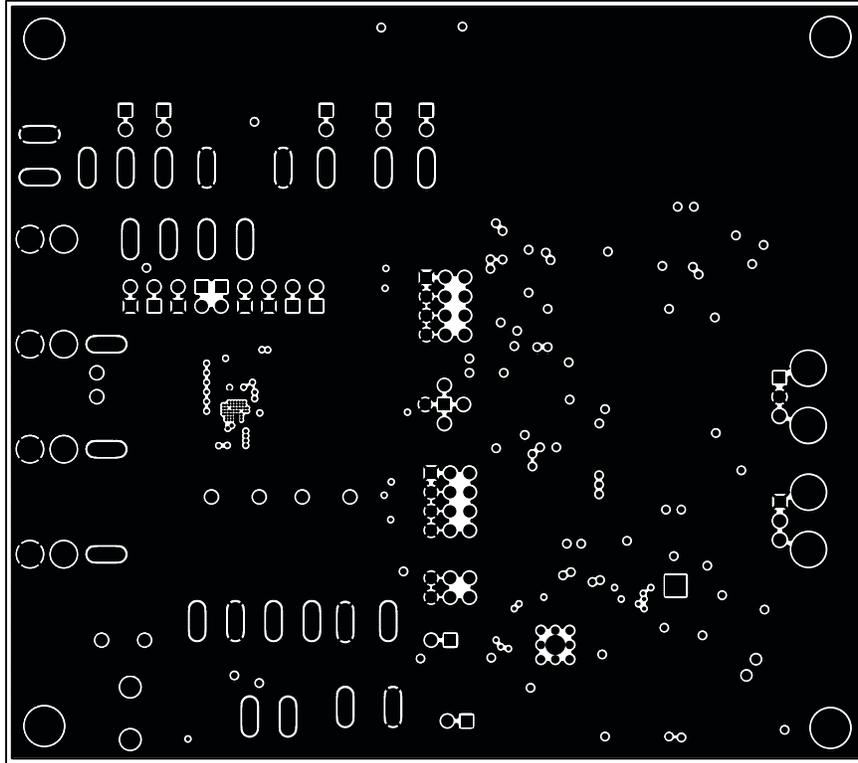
MAX9888 EV Kit PCB Layout—Ground Layer 2
